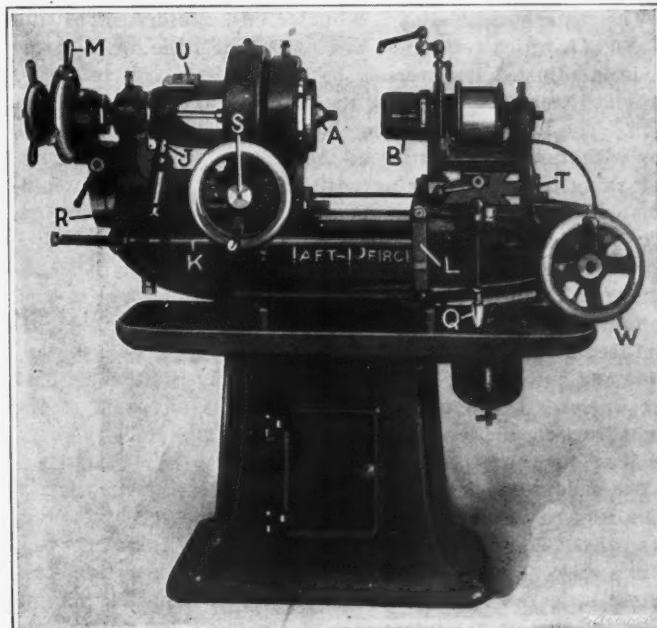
Taft-Peirce Thread Milling Machine of Multiple-cutter Type
